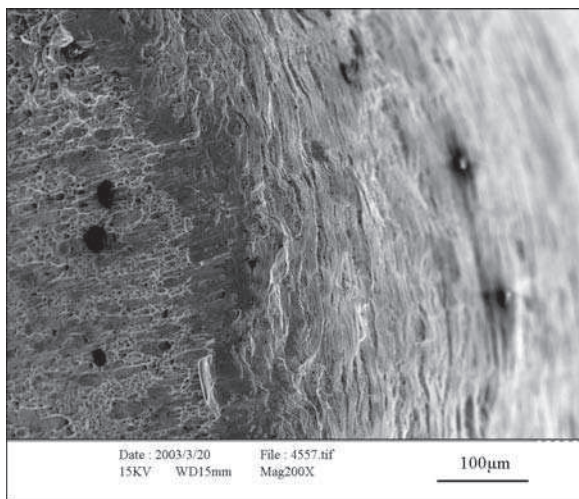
Sample tested in oxygen, fracture surface edge and gage surface.
